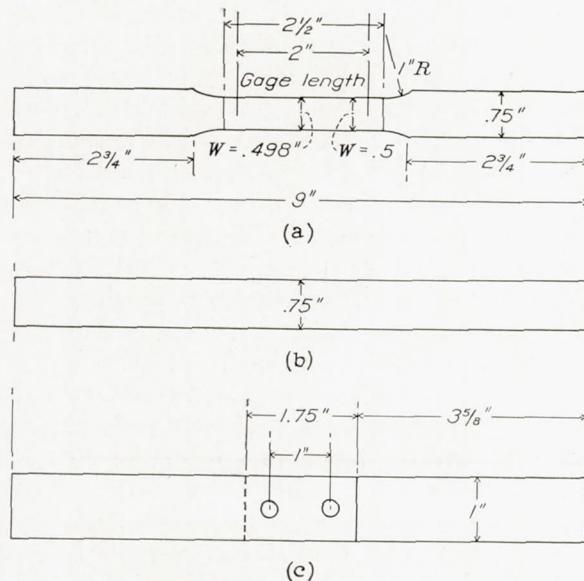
Dimensions of 0.064-inch thick aluminum-alloy materials used in the weathering tests. (a), tensile bar; (b), strip sample; (c), spot-welded or riveted panel. The welds and rivet heads were approximately $\frac{1}{4}$ inch in diameter; the rivet shanks were $\frac{1}{8}$ inch in diameter.
